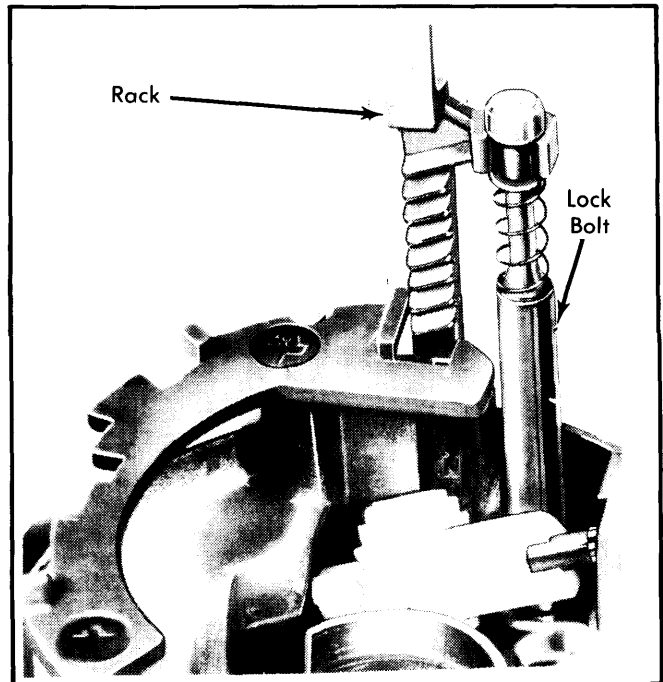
Installing Lock Rack and Bolt into Shift Bowl
